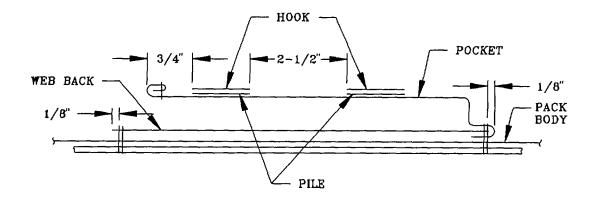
(AT4 Pack) Pocket Assembly Lowering (Sheet 1 of 2)
